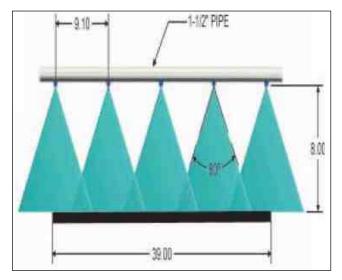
Flat spray nozzle manifold illustration using an 80° spray angle (Courtesy of Lechler, Inc., St. Charles, IL).
